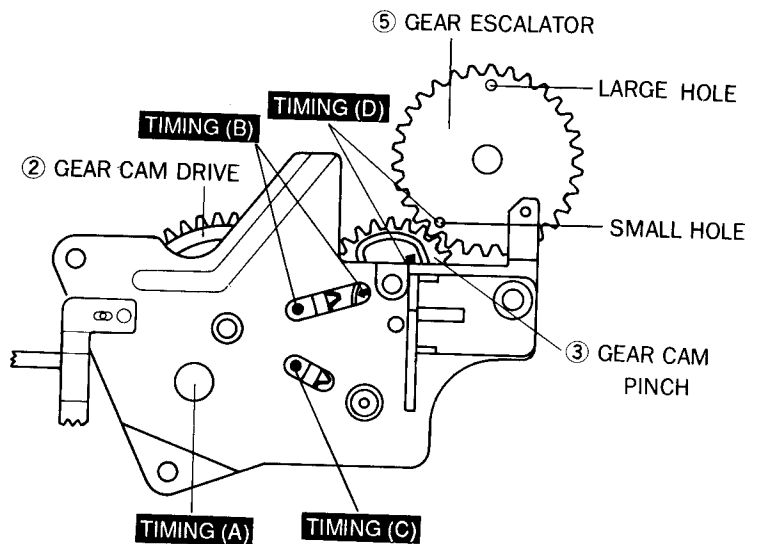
Reassembly of Drive Pinch Ass'y & Gear Escalator
